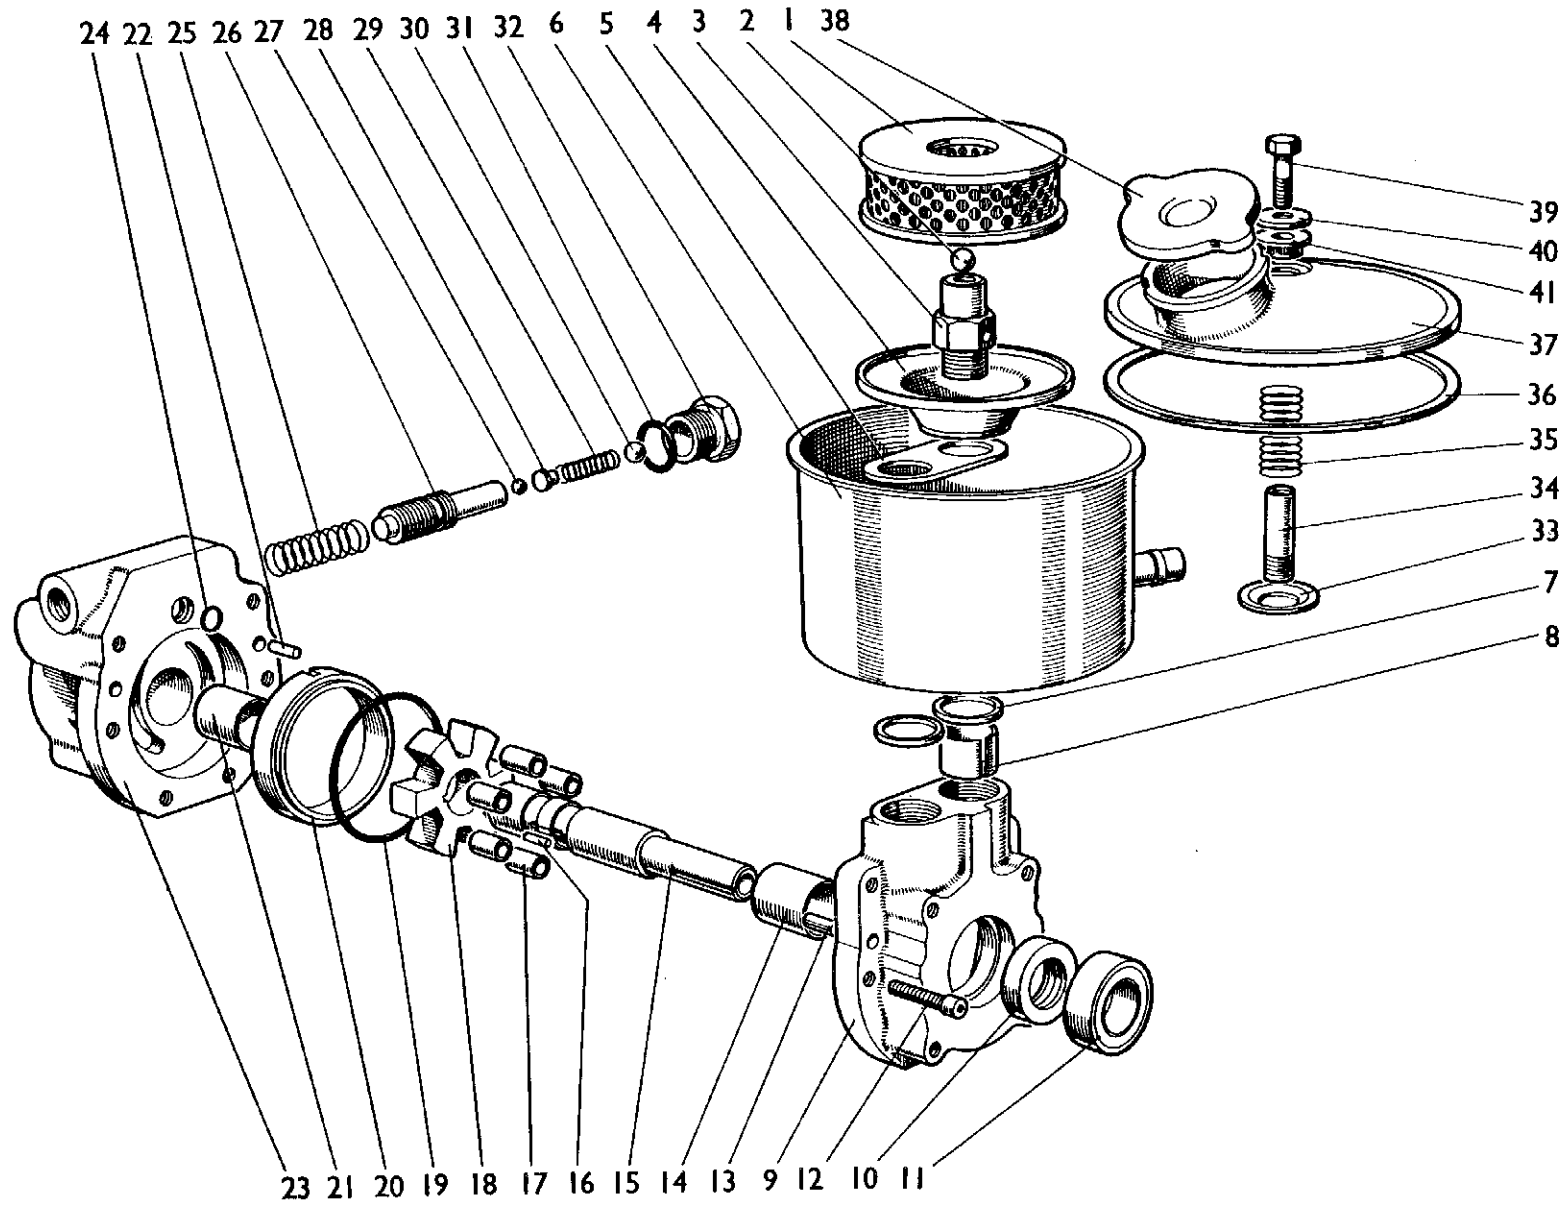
HYDRAULIC PUMP ASSEMBLY 904511
